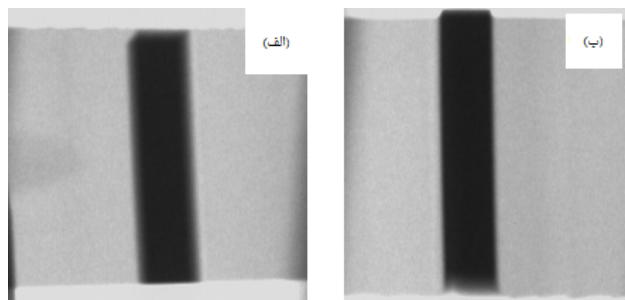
Radiograph picture from top surface of joints which welded by (a) 720 rpm and (b) 980 rpm and 69 mm/min traveling speed
